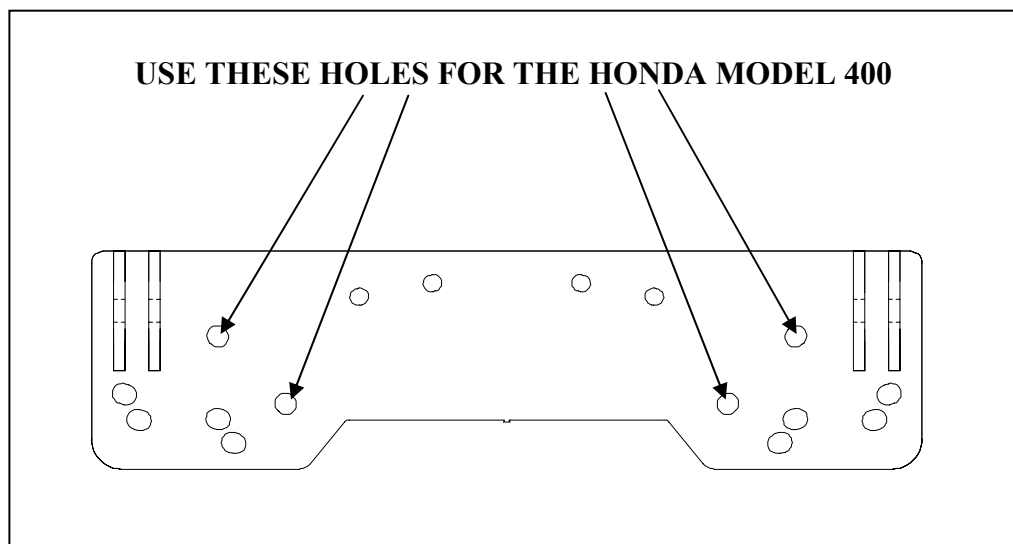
FRAME MOUNTING HOLE LOCATIONS
